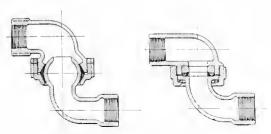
Cross-Sections of Westinghouse Metallic Joints.
